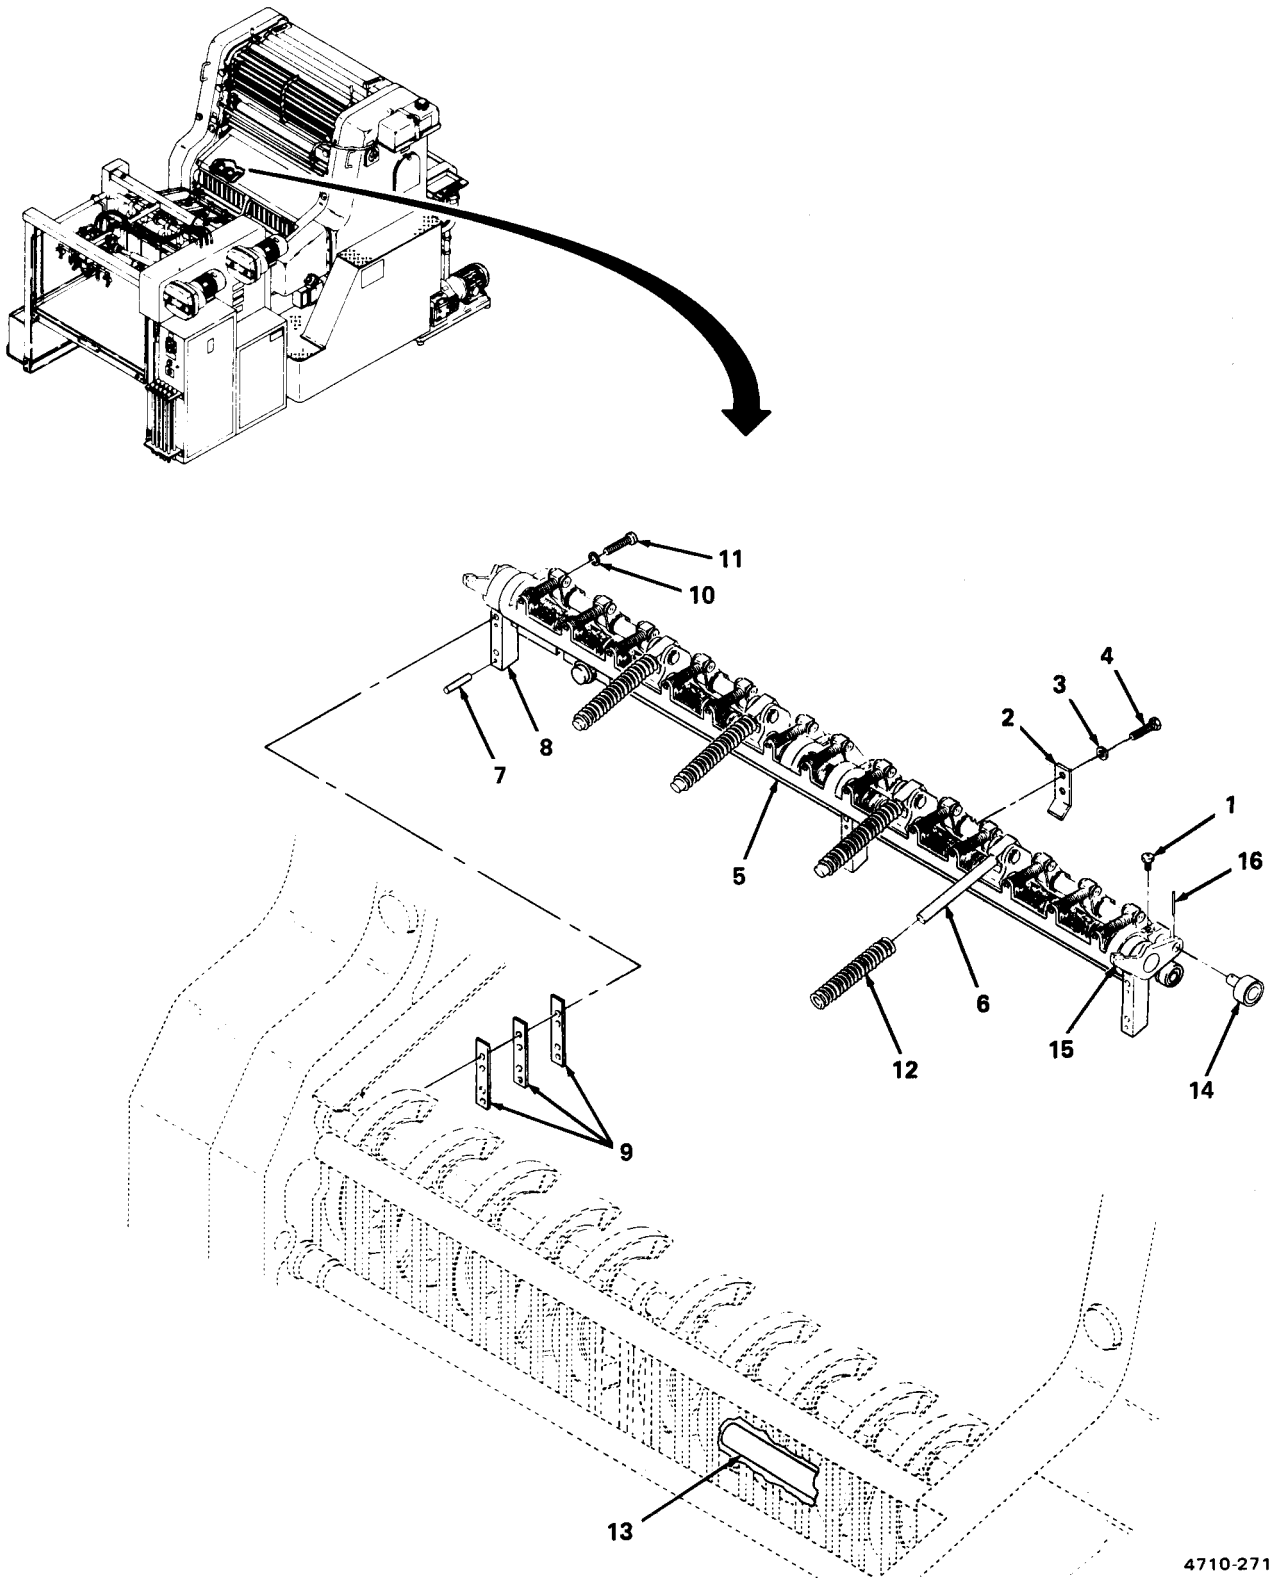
Ranger Drum Gripper Bar Assembly.
